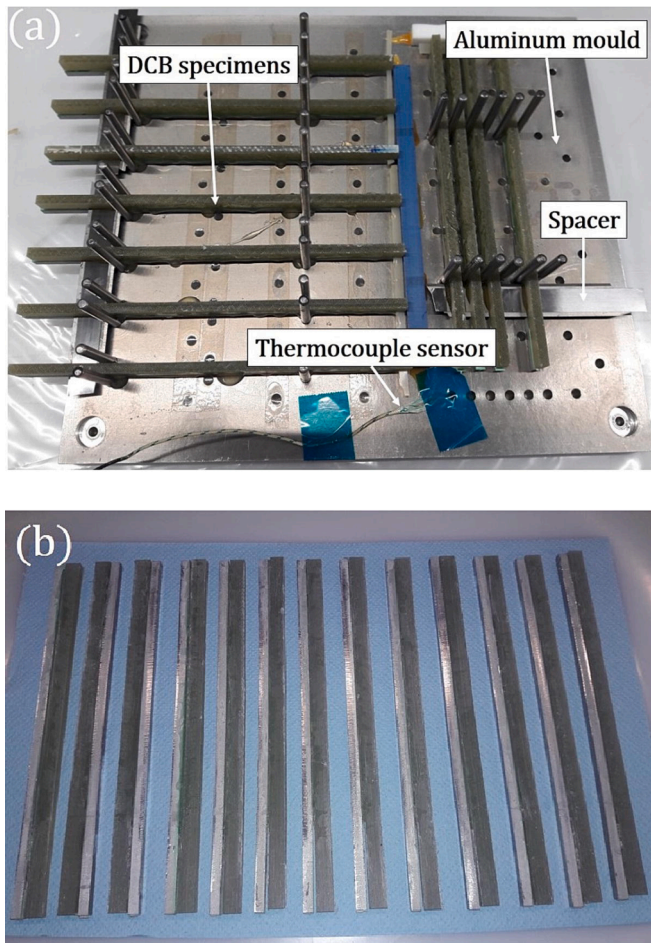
DCB specimens: (a) in aluminium mould and (b) after curing.
